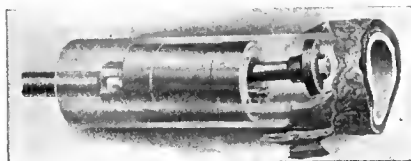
REMOVING SCALE FROM OUTSIDE OF BOILER TUBE.
